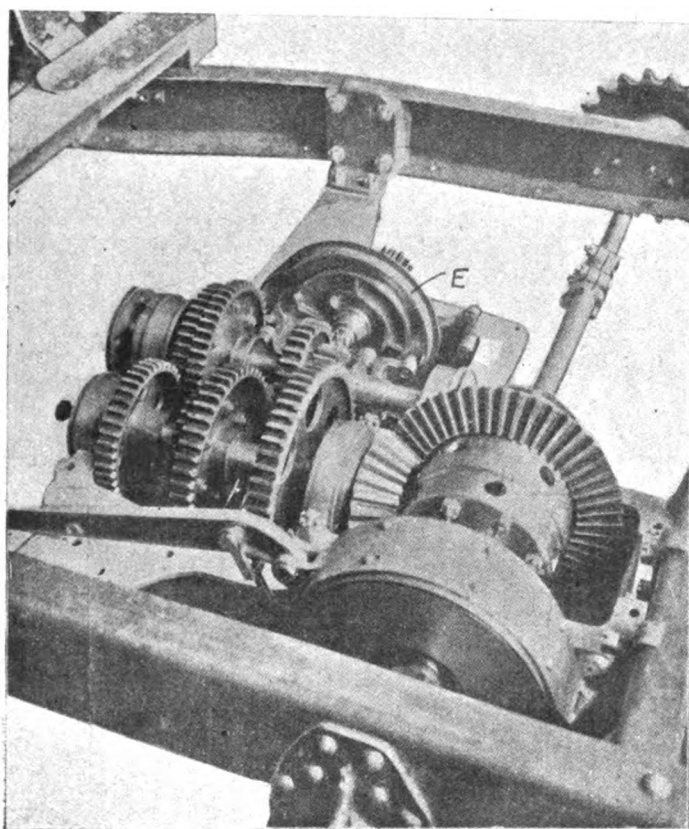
VIEW OF NEW CHANGE-SPEED GEAR.
